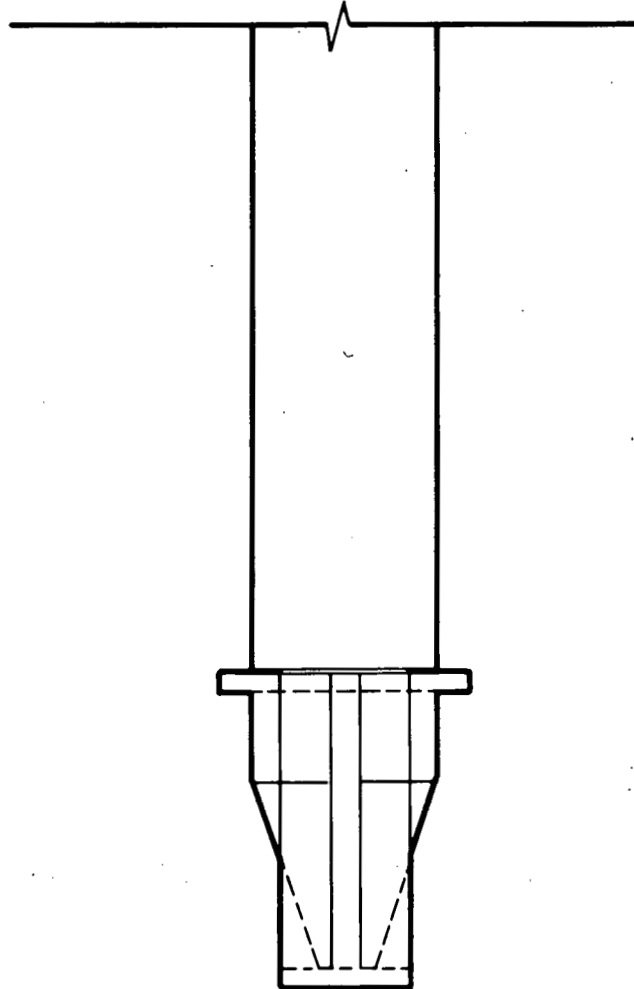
B3-21. Lower End of Fuel Assembly Tightening Rod
